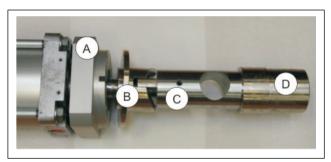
SD501 sampler body: A - cylinder fitting, B - sealing element, C - piston, D - cylinder pipe.
